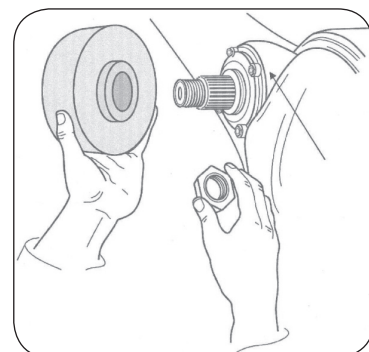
Remove bearing cage bolts to ensure seal is installed completely.
